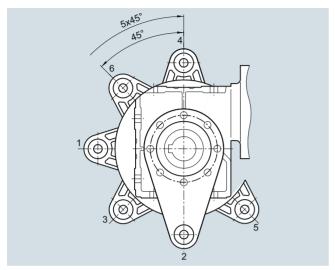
/13 Worm gearboxes S in a shaft-mounted design
